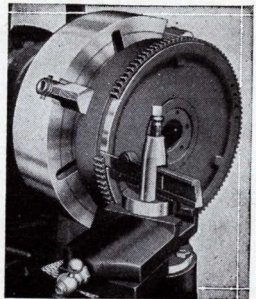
Machining Flywheel for New Ring Gear by Undercutting Worn Teeth with Parting Tool
